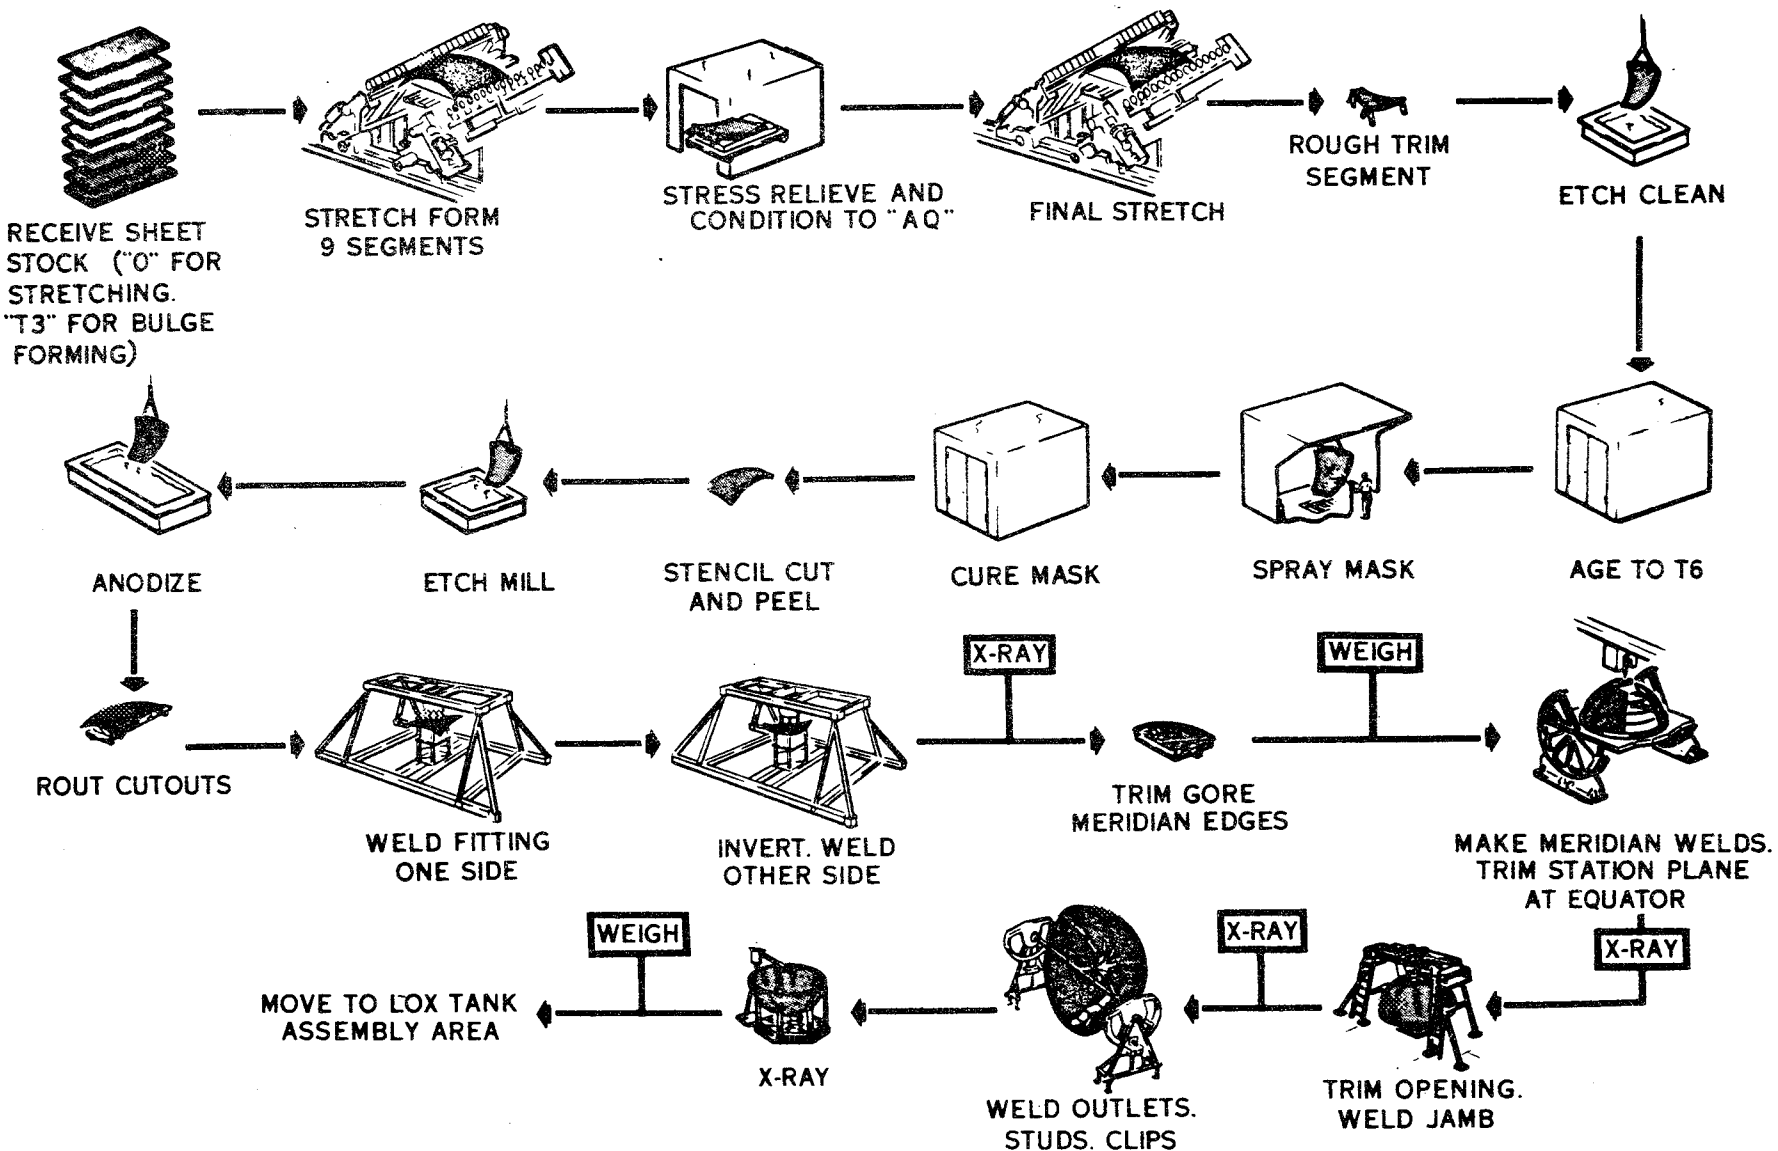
S-IVB LOX TANK AFT BULKHEAD MANUFACTURING SEQUENCE
